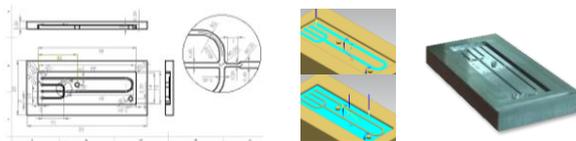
Manufacturing process realization: (a) technical drawing of a mould with micro features; (b) CAM tool path generation of operations; (c) machined exemplary mould.
